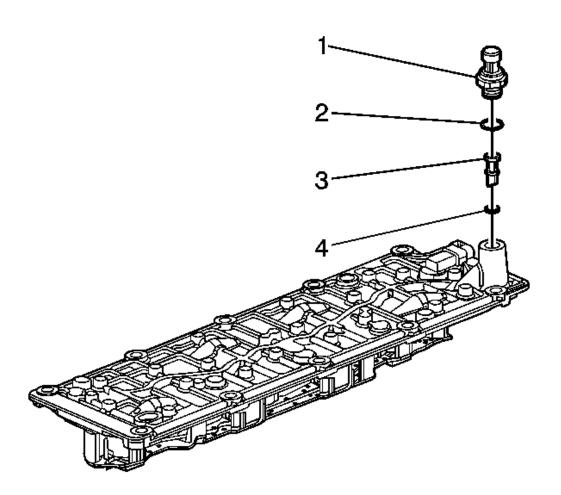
View Of Oil Pressure Sensor Courtesy of GENERAL MOTORS CORP.
